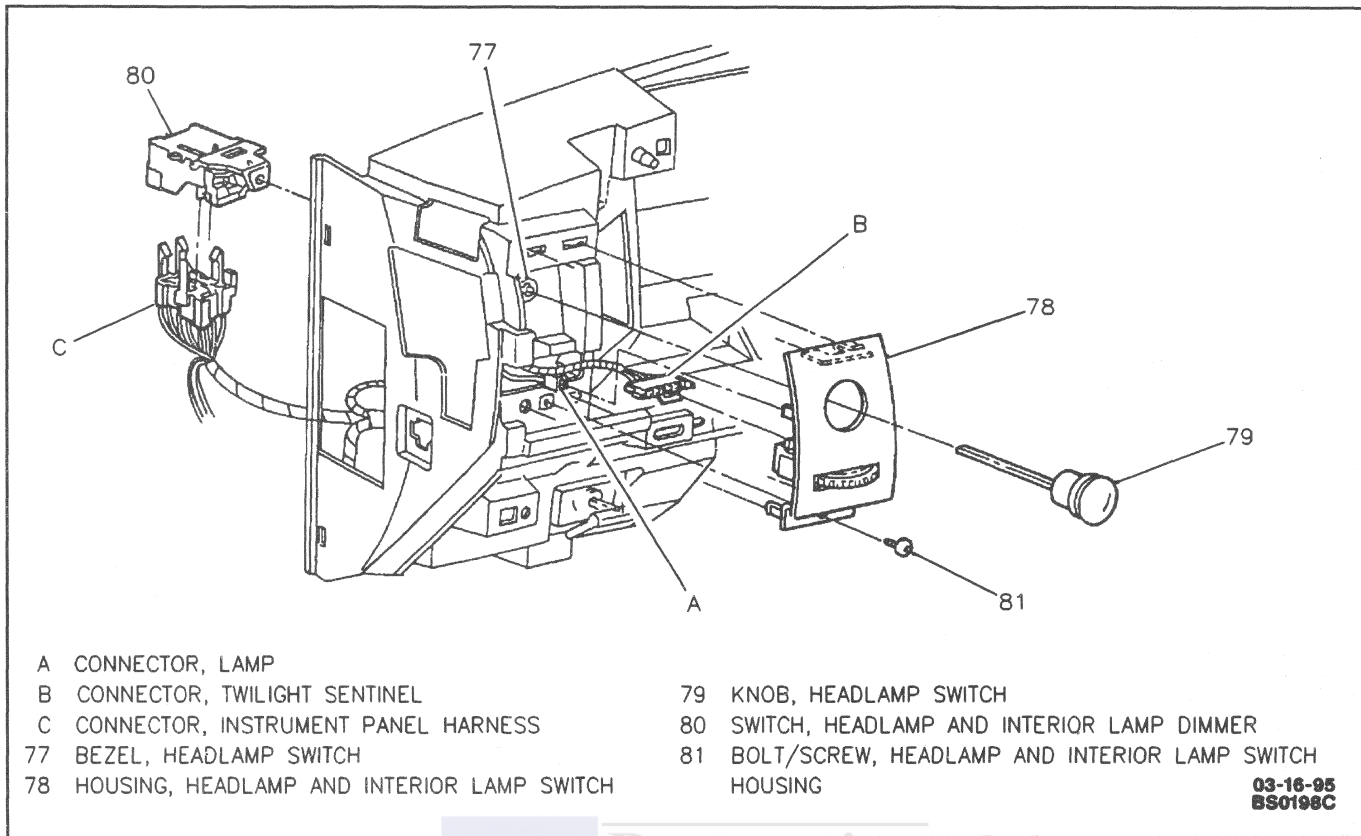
Headlamp and Instrument Panel Lamp Dimmer Switch - (Buick)
